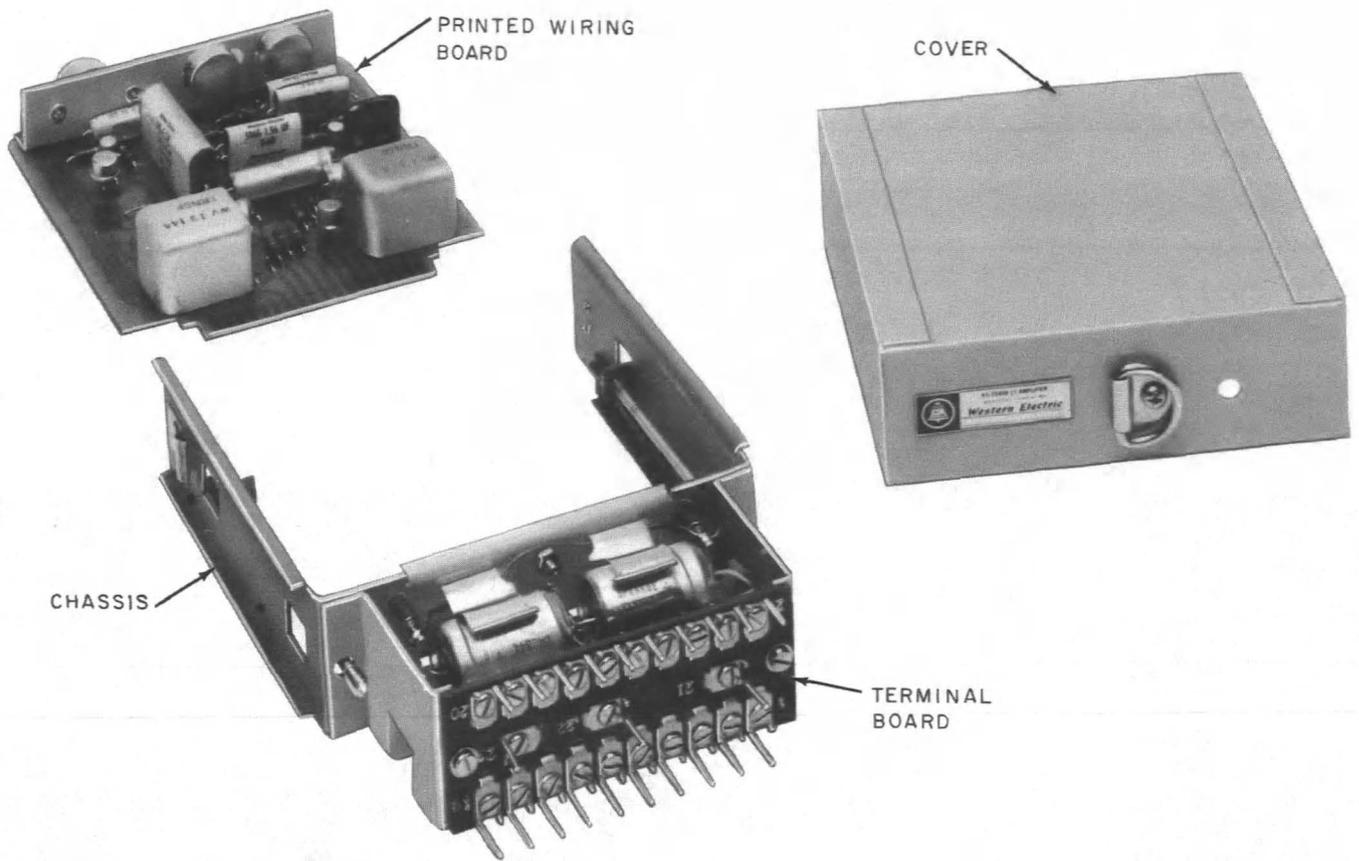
KS-20449 Amplifier—Terminal View With Printed Wiring Board and Cover Removed
